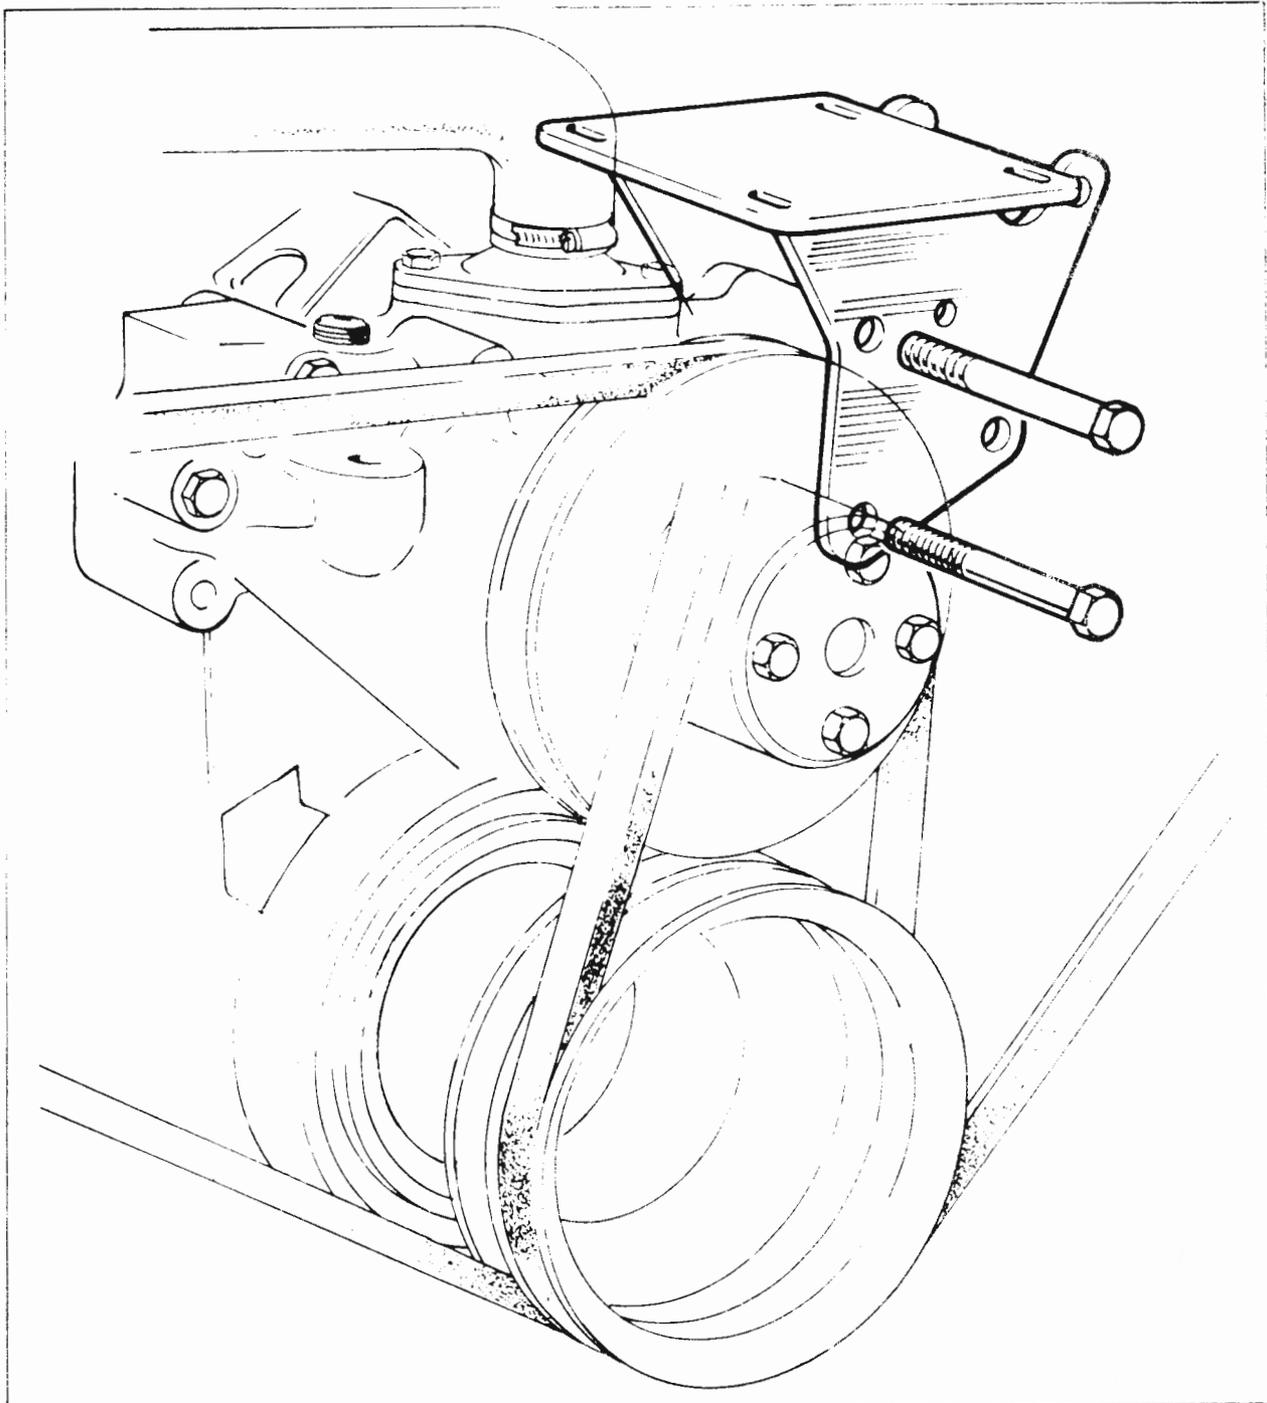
Details of Compressor Mounting bracket and bolts
